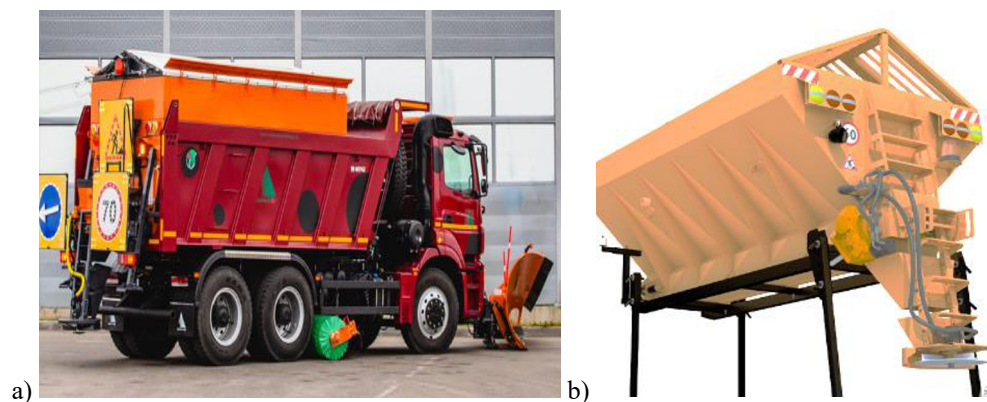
Machine for spreading sand: a) - general view of the machine; b) - the implement of the machine with a body.
